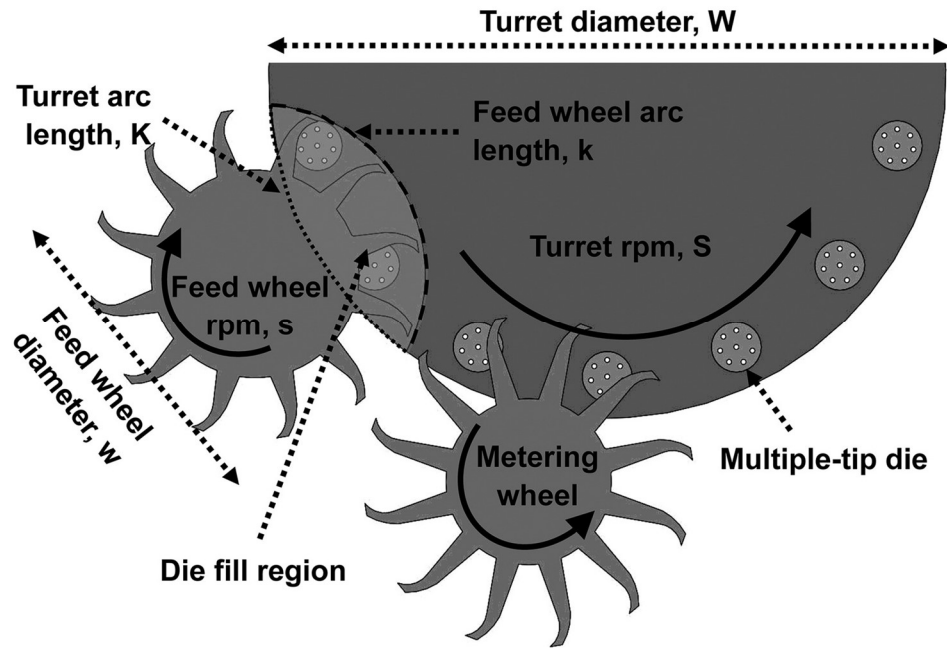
Schematic picture showing the turret, feed wheel and metering wheel on the rotary press (Goh et al. 2019).
